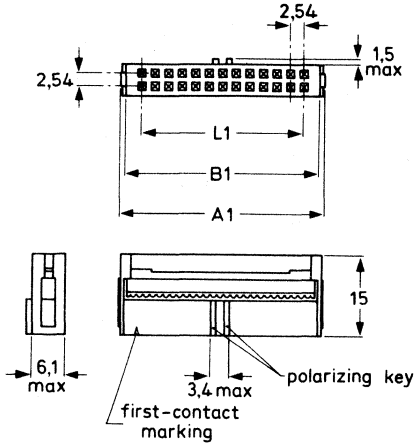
Cable connector with polarizing key; for dimensions A1, B1 and L1, see Table 1.
